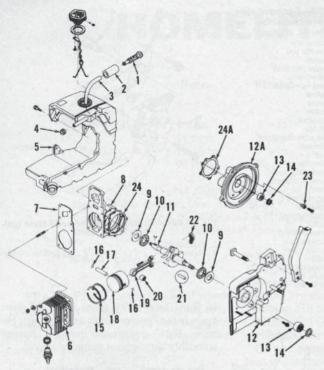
Exploded view of engine. Drivecase (12) is used on saw engines while pump housing (12A) is used on pump engines. Refer to Fig. HL43-5A for brushcutter drivecase.
